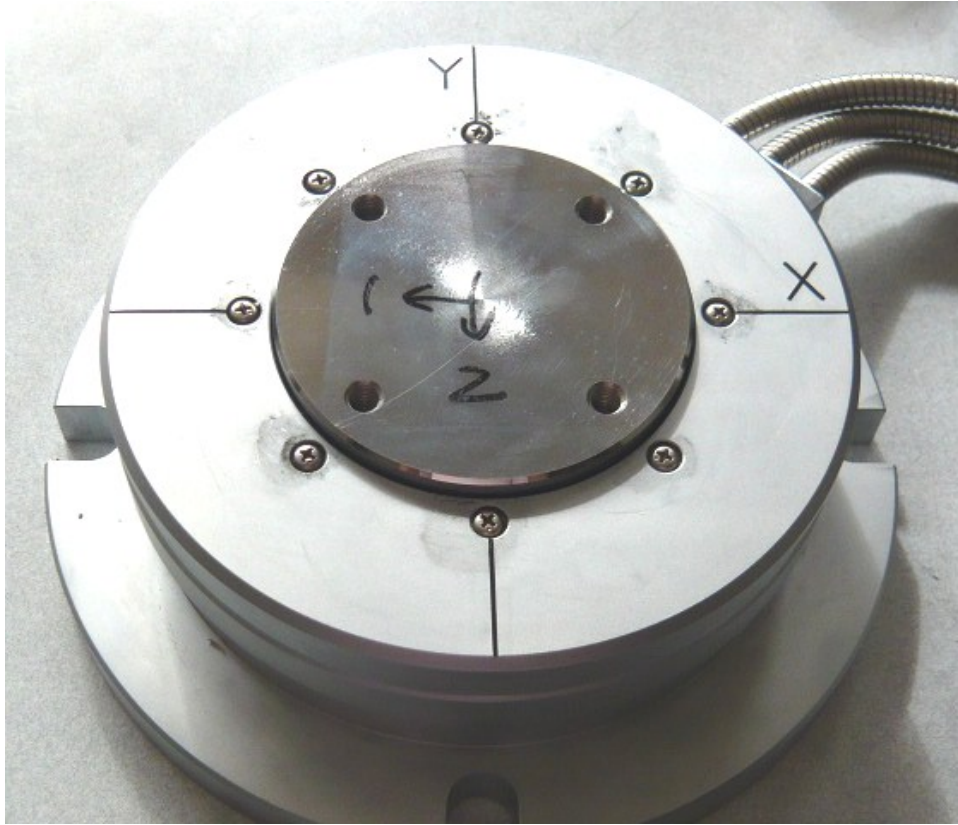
AST-ZM type tool strain gauge dynamometer
